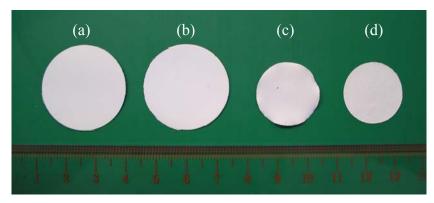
Digital macrographs of MgO tapes fabricated after (a) tape casting, drying and die cutting; (b) BBO; (c) sintering and; (d) creep flattening.
